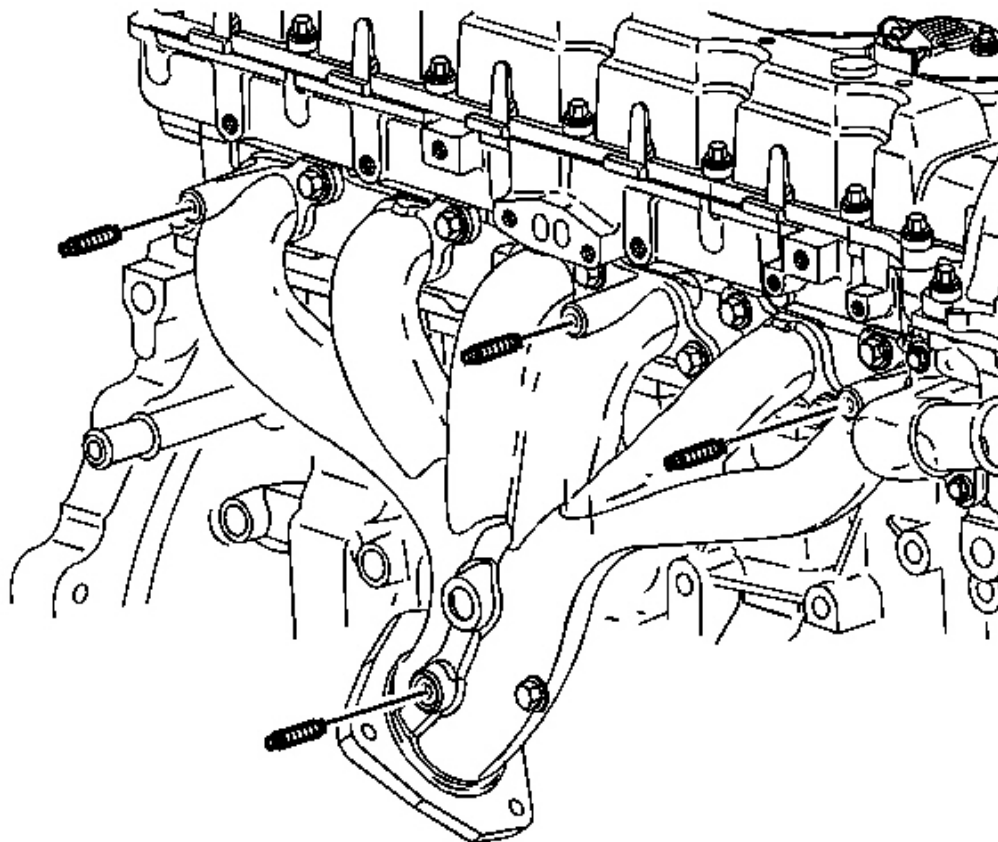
View Of Exhaust Manifold Heat Shield Studs - 4.2L
